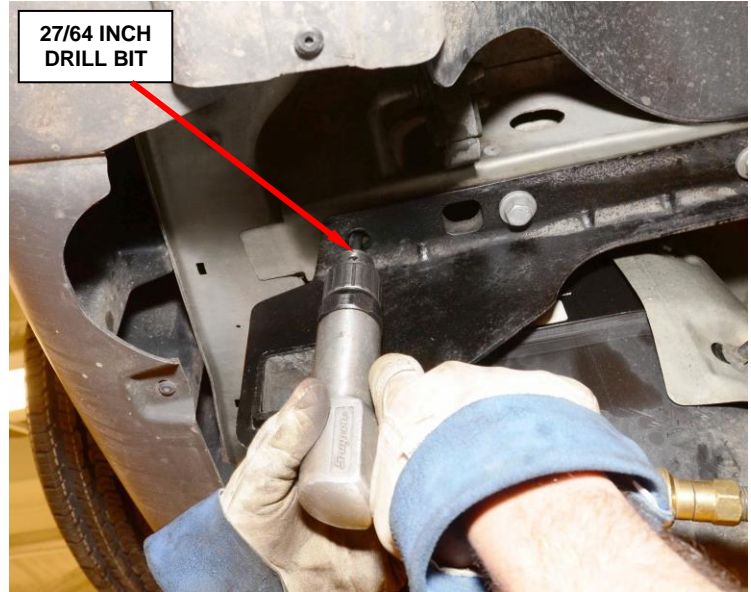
Drill out Weld Nut(s) Threads
